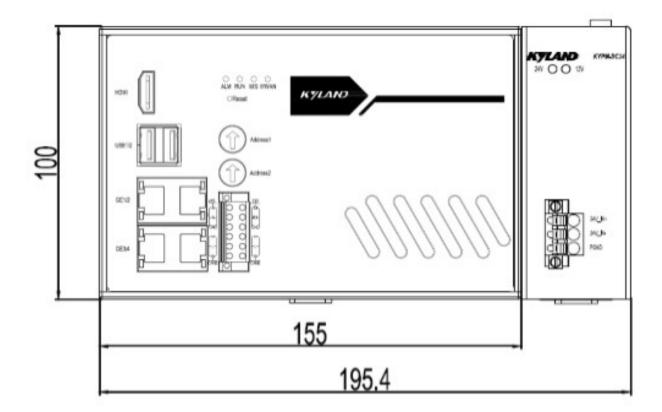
NewPre5100-P611-M2-D1-N1-W0 installation dimension drawing (Unit: mm)
